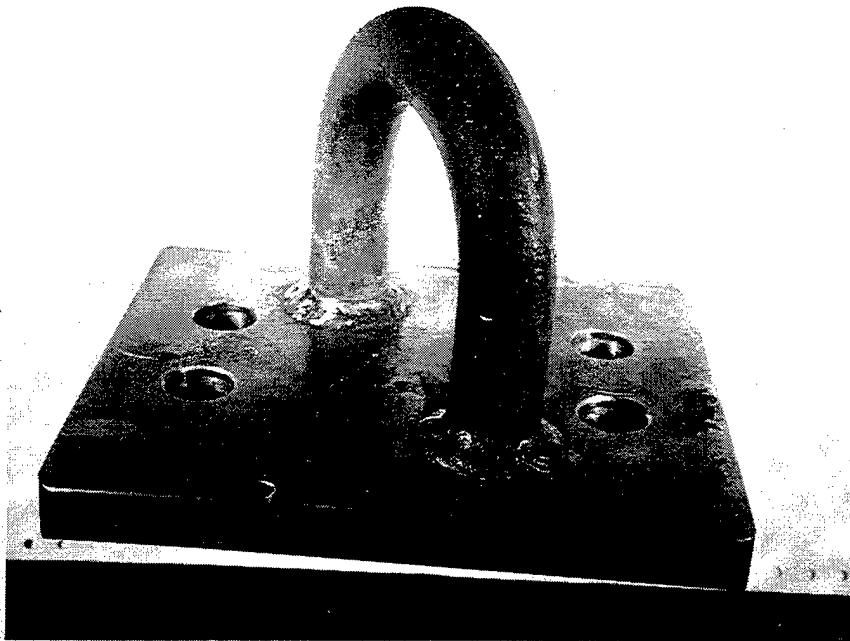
A view of the new lifting device fabricated for the Class 70 Modified AVL B. In addition to the fillet weld around both legs of the U-shaped bar on top of the plate, both ends of the bar also were welded on the bottom of the plate. Note the 30° orientation of the bar to the vertical axis of the device. Approximately 1/2 size.
